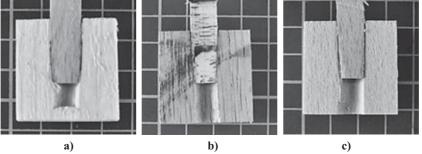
Cross-section of the dowel welded parallel to the fibre orientation for: a) spruce; b) oak; c) beech
